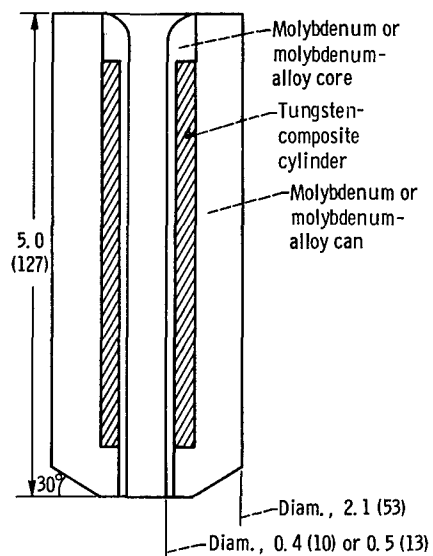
Billet assembly for extrusion of tungsten-composite tubing. (Dimensions are in inches (mm) unless indicated otherwise.)
